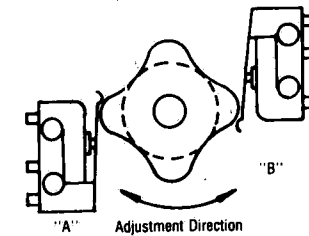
ACTUATOR CAM ADJUSTMENT.
